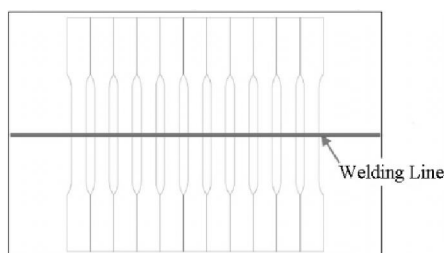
Schematic of welded specimens of tensile test
